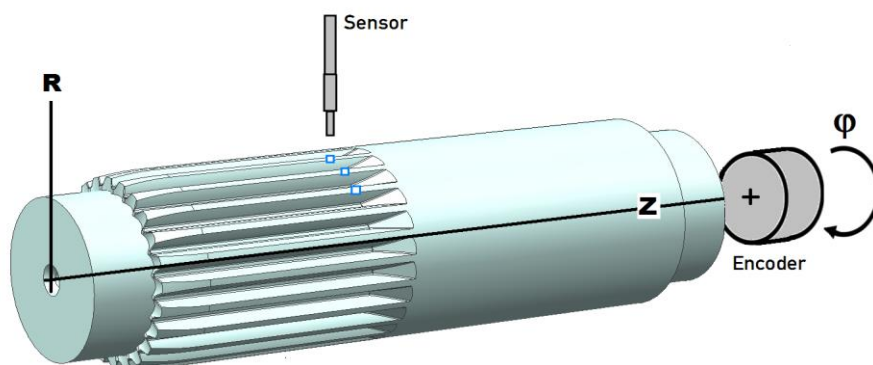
Config. sensors / workpiece coord. system R , Z , φ
